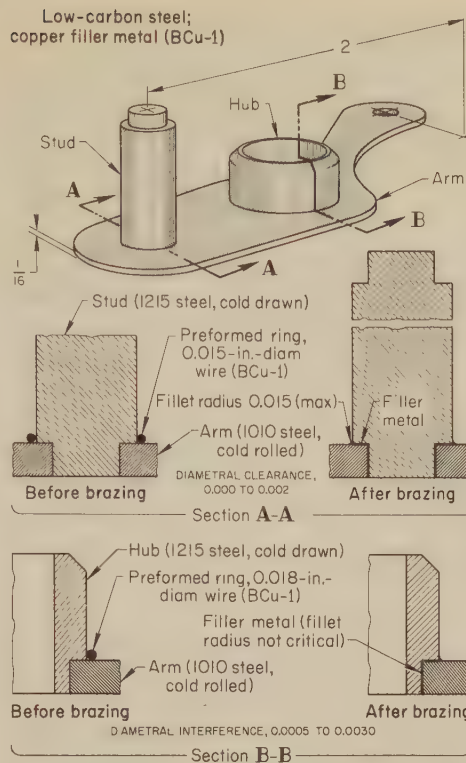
Assembly for which size of filler-metal fillet in one of two brazed joints was controlled by use of smaller-diameter wire, and by designing joint with clearance instead of interference (Example 559)
